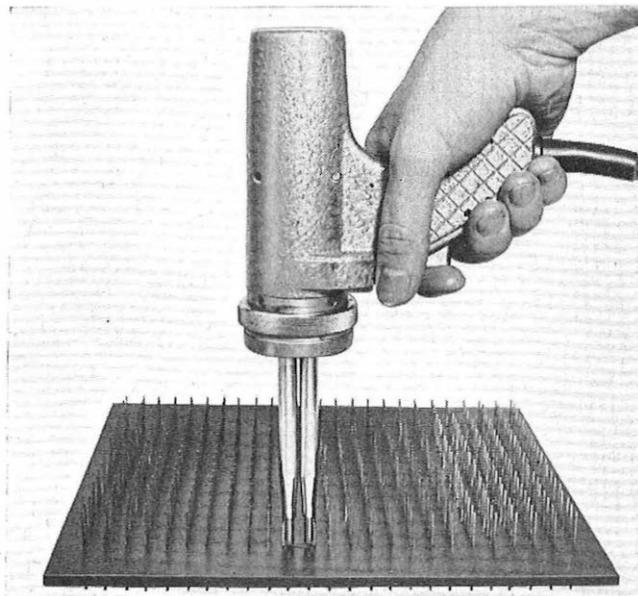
DOUBLE-HEADED WRAPPING GUN IN ACTION
